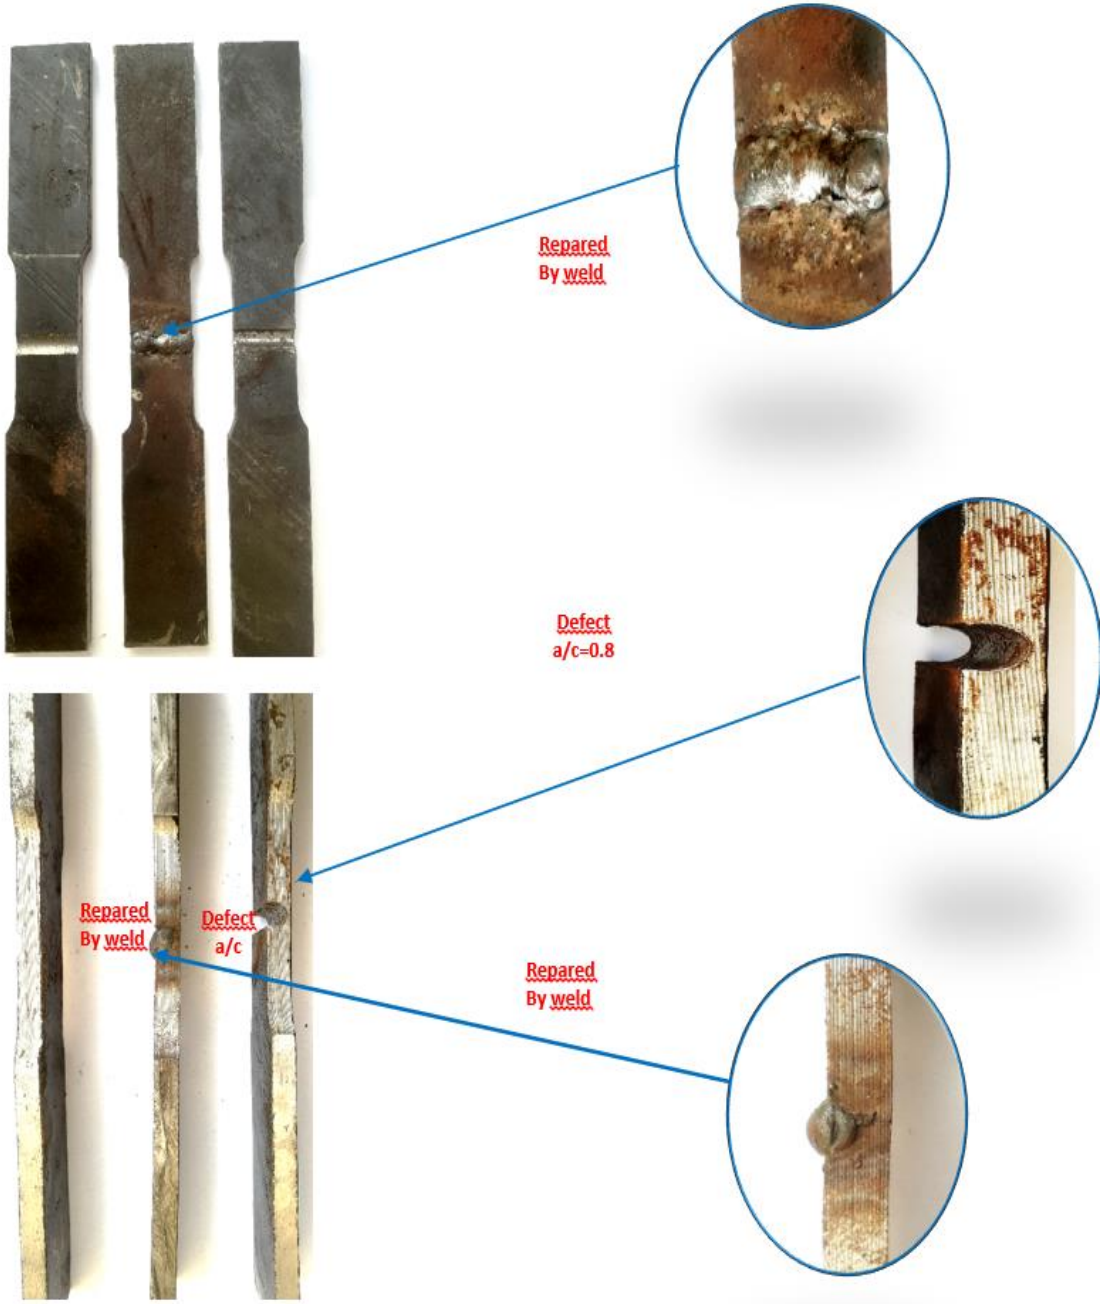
Specimen with defect, without defect, and repaired by weld.
